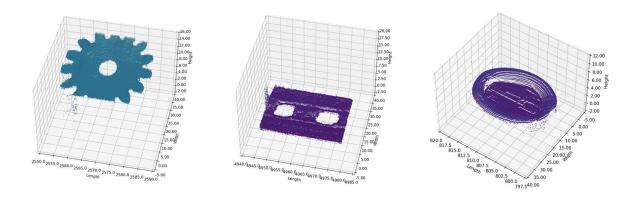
3D Scanning Results: Gear, Flat Joint, and Cap
